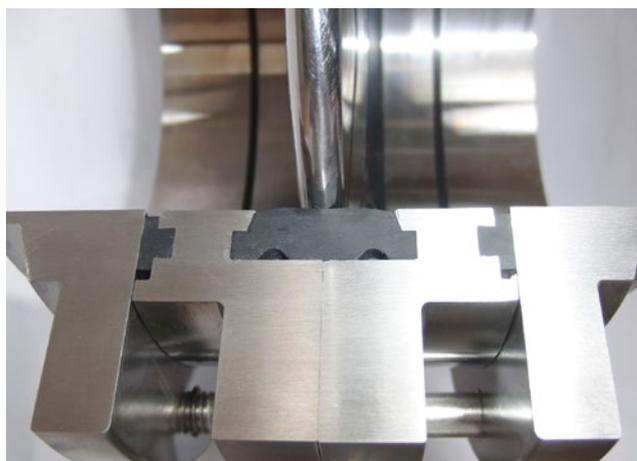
Cross-sectional view of a butterfly valve with optimum installation situation for the seal.
